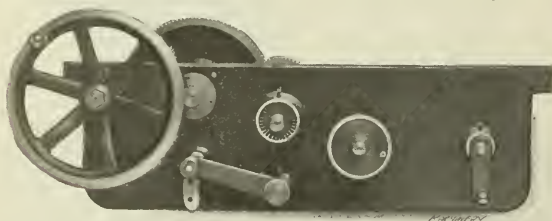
Houston, Stanwood & Gamble Lathe Apron partially disassembled
